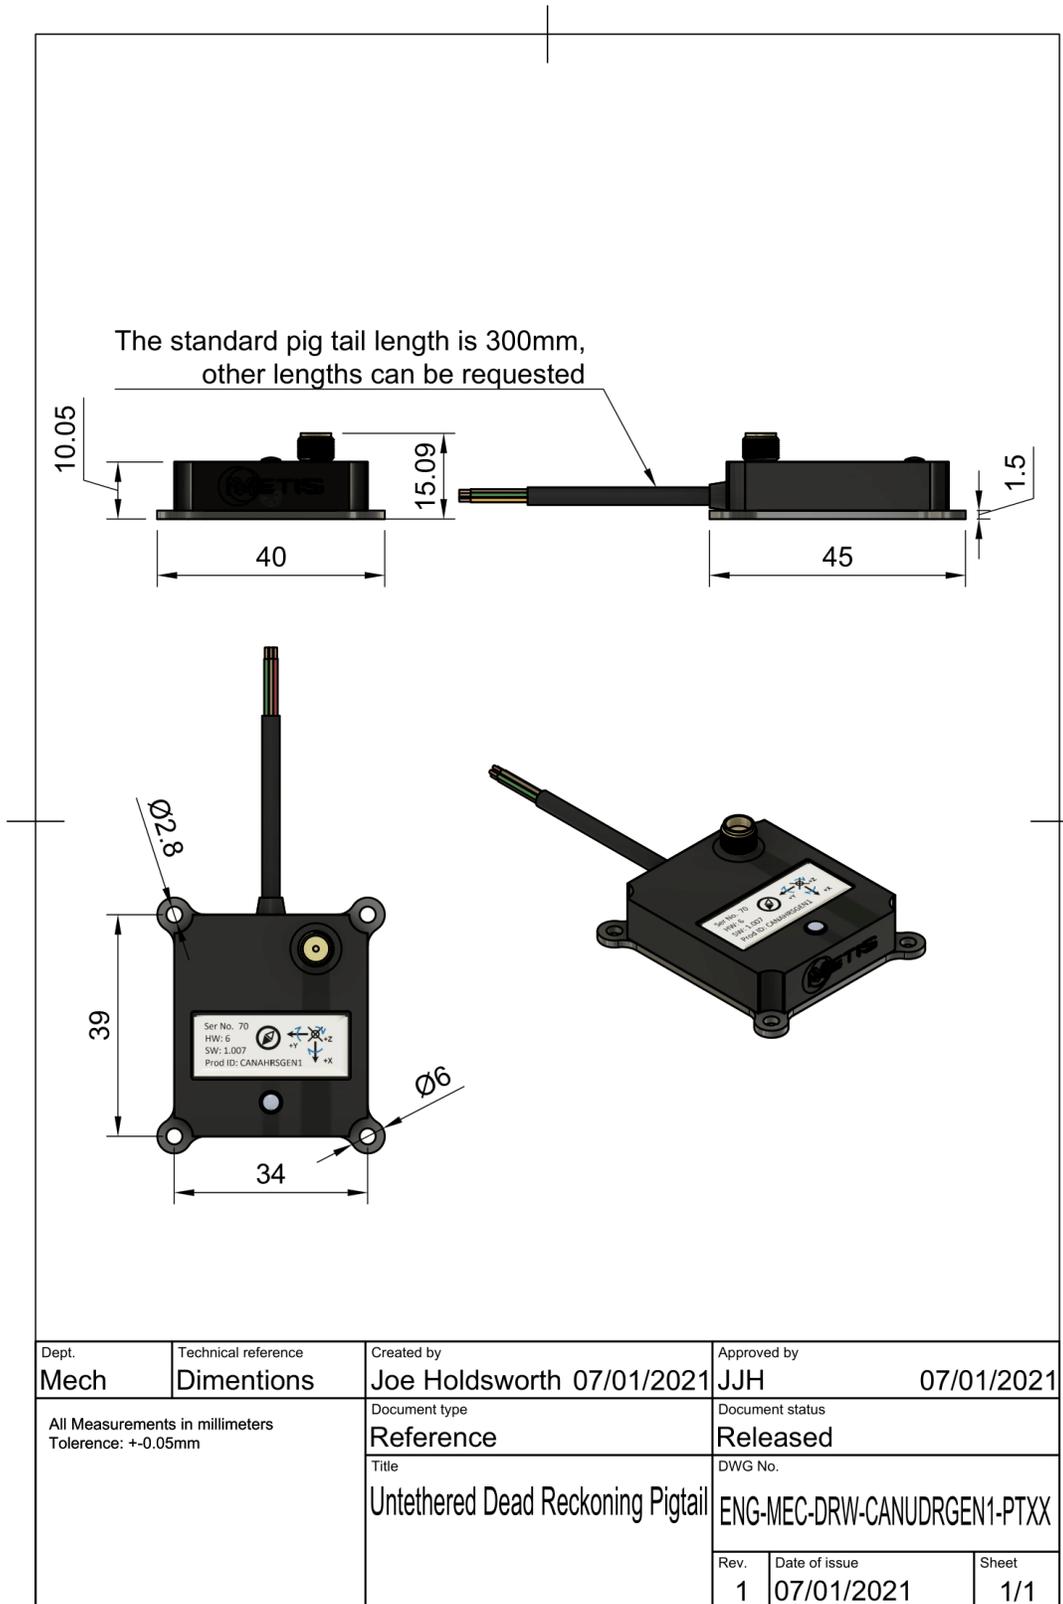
PIGTAIL SENSOR DIMENSIONS
